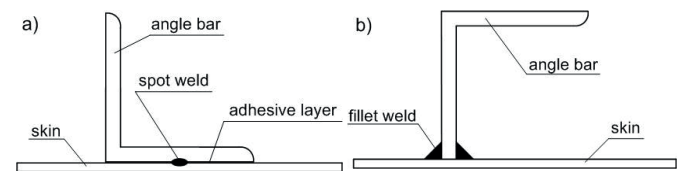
Mounting of angle bar by using: a) spot welding and adhesive bonding, b) laser welding
